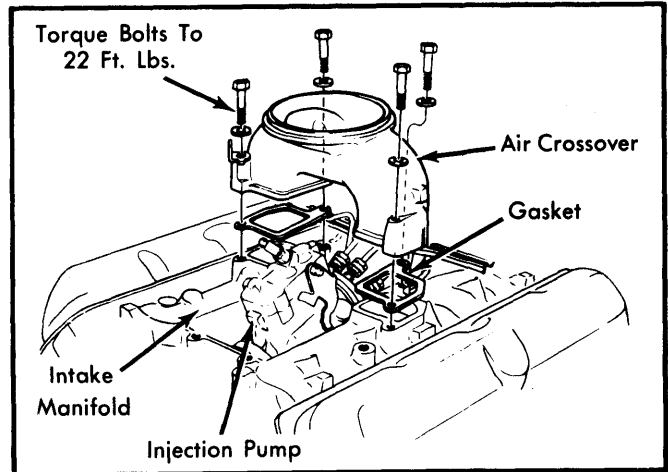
Disassembled View Of Air Crossover Assembly on GM Diesel Engine
